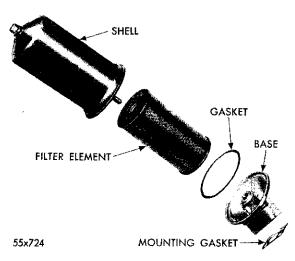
Full Flow Type Oil Filter (Disassembled View)
